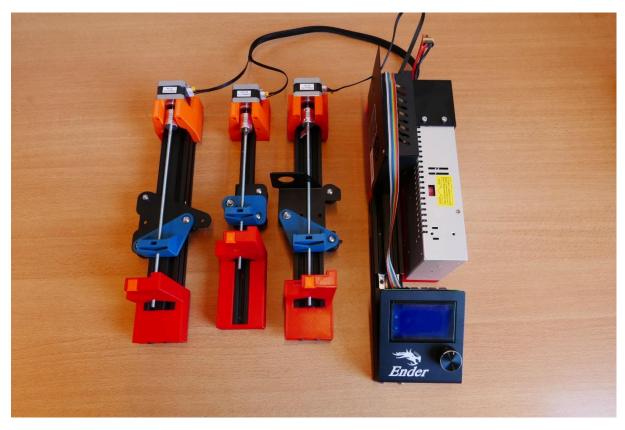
The fully assembled pump system, with the stepper motor cables attached.
